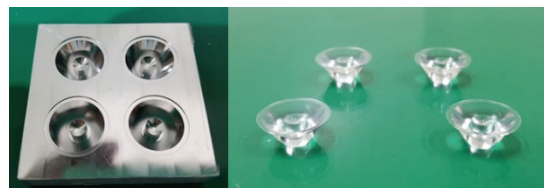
Photograph of the fabricated TIR lenses and aluminum mold for casting.
